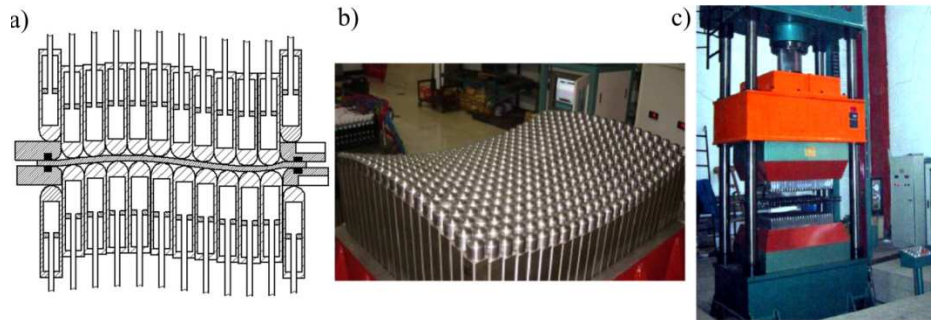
Reconfigurable surface tooling (a), multi-punch stamping die (b) and multipoint forming press machine YAM8-315 (c), prepared on the basis of [21, 23]
